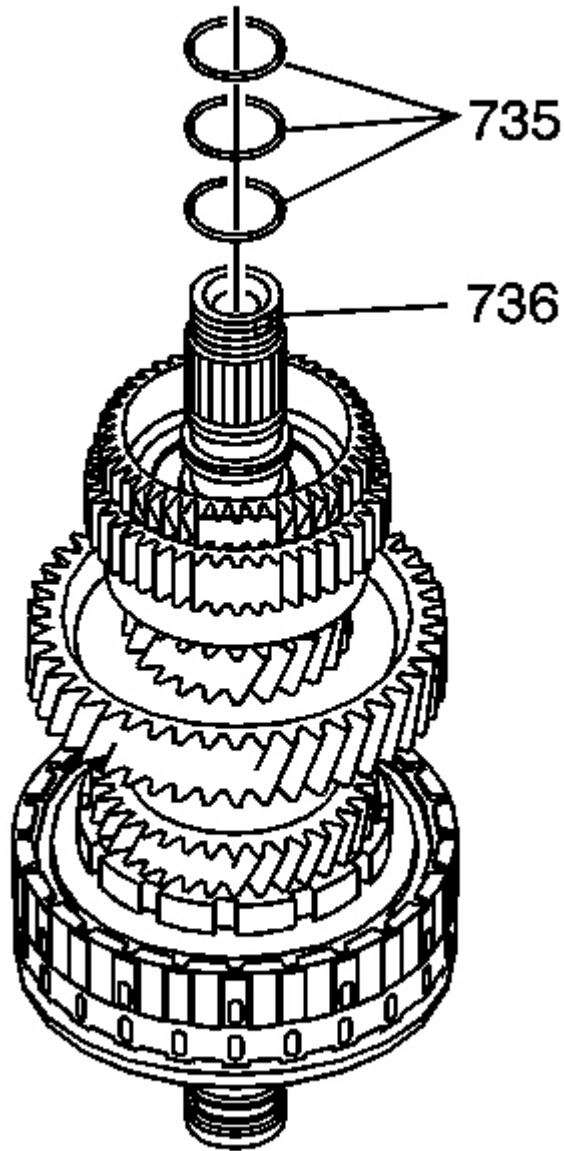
1st And Coast Clutch Housing & 1st And 2nd Clutch Shaft
